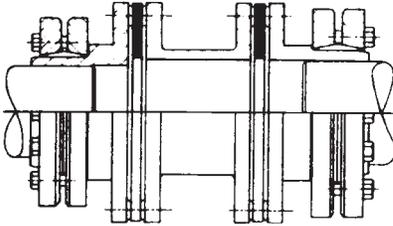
Double flexing mounted with Shrink Discs® for absolutely backlash-free shaft-hub connection and axial adjustment capability.
